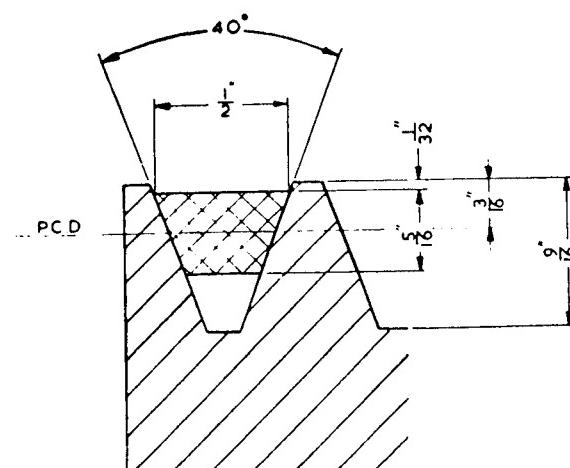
Vee Pulley Dimensions for "A" Section V-Belts
